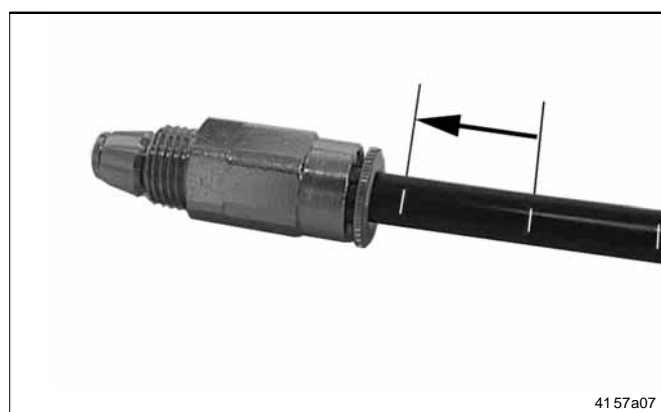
Feed line insert into the check valve up to the next white mark
